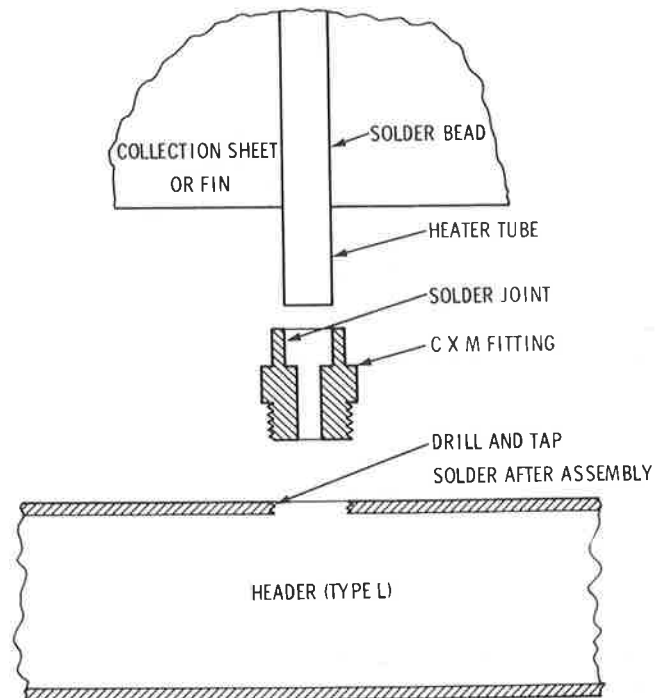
DETAILS OF MANIFOLD FABRICATION
